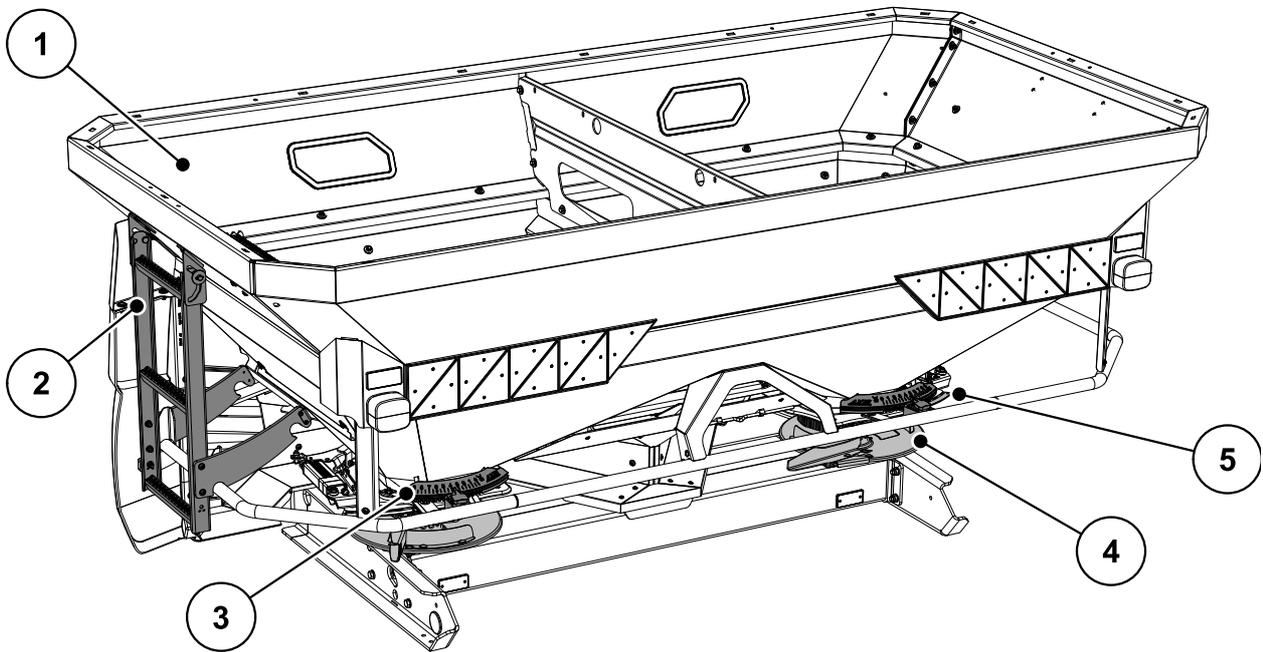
Assembly overview AXIS 50.1 - Rear
